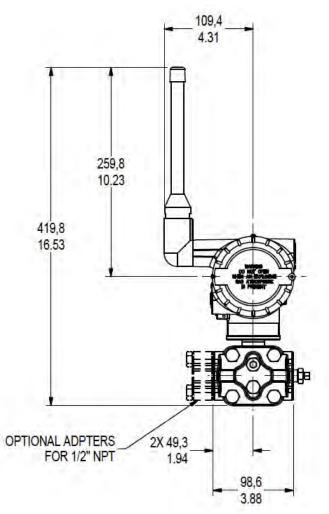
Typical mounting dimensions for STDW810, STDW820, STDW830 and STDW870 (4 dBi antenna shown, rear view)
